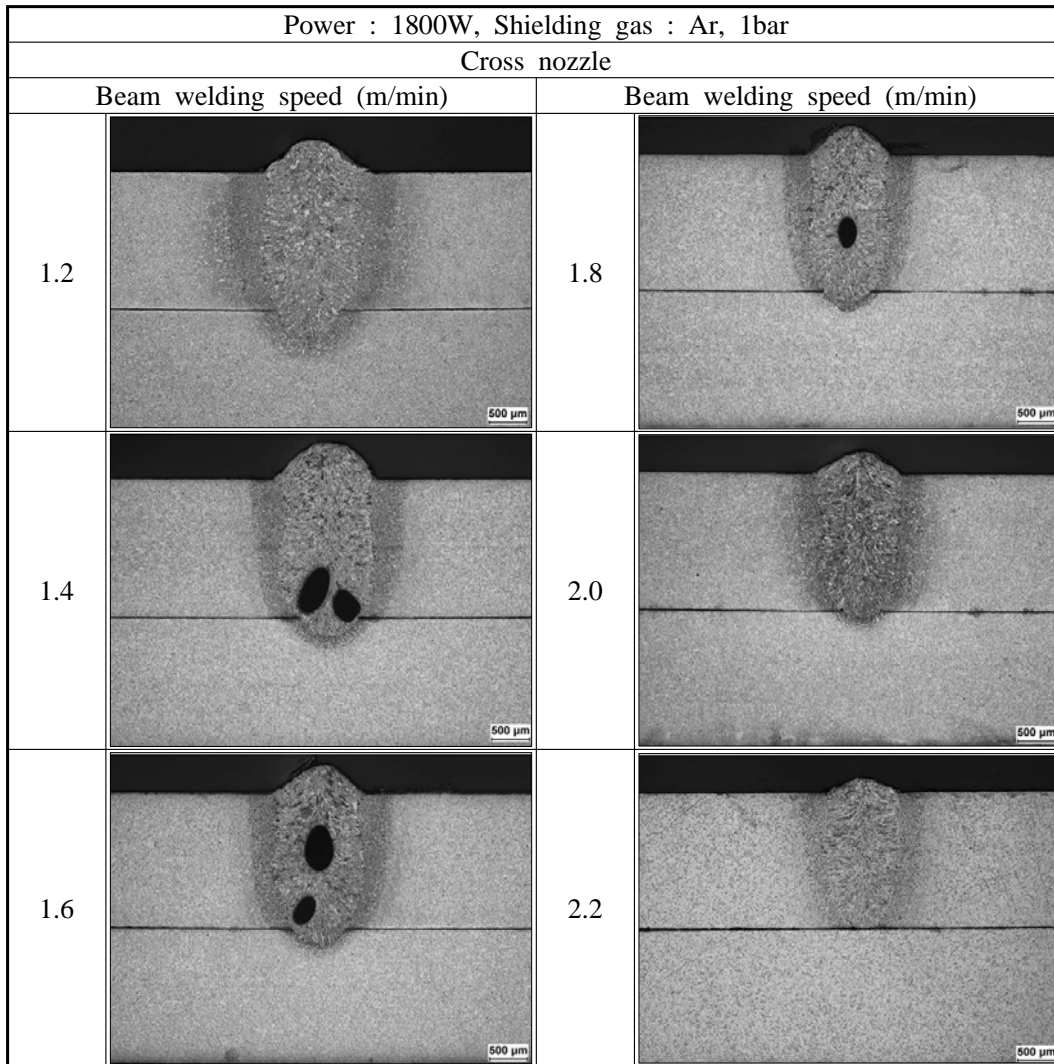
Cross-section of welding zone after beam welding speed
